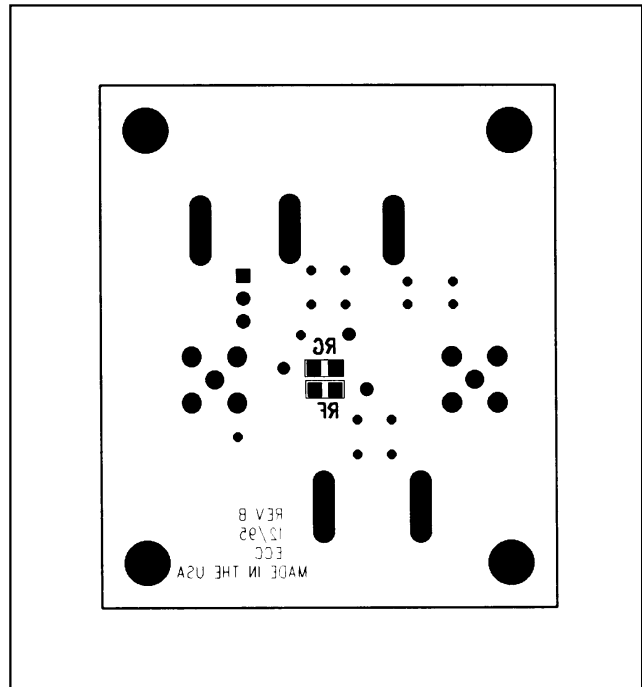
MAX4278 EV Kit Component Placement Guide—Solder Side
